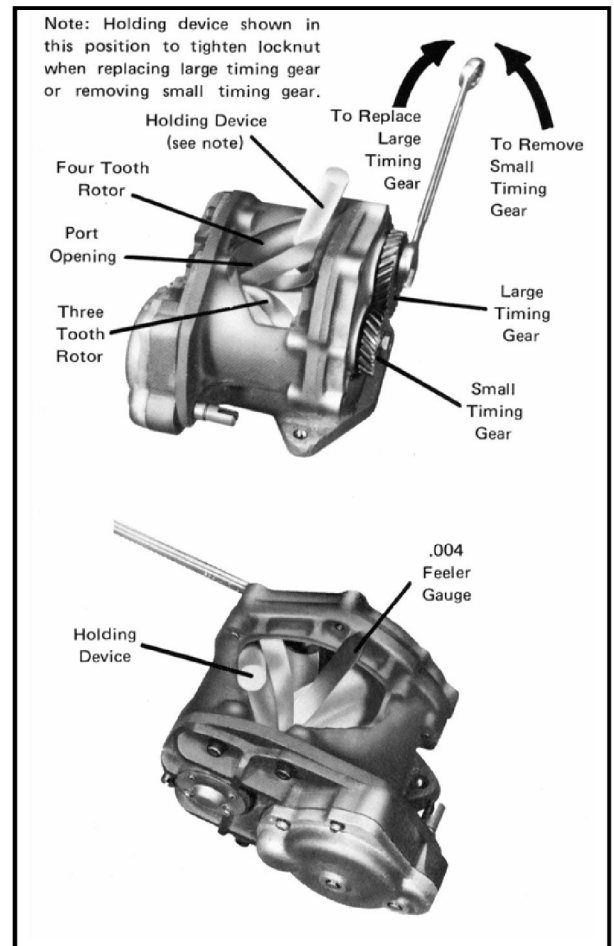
Typical Method for Blocking Rotors when Timing Rotors and when replacing large Timing Gear or removing small Timing Gear.
